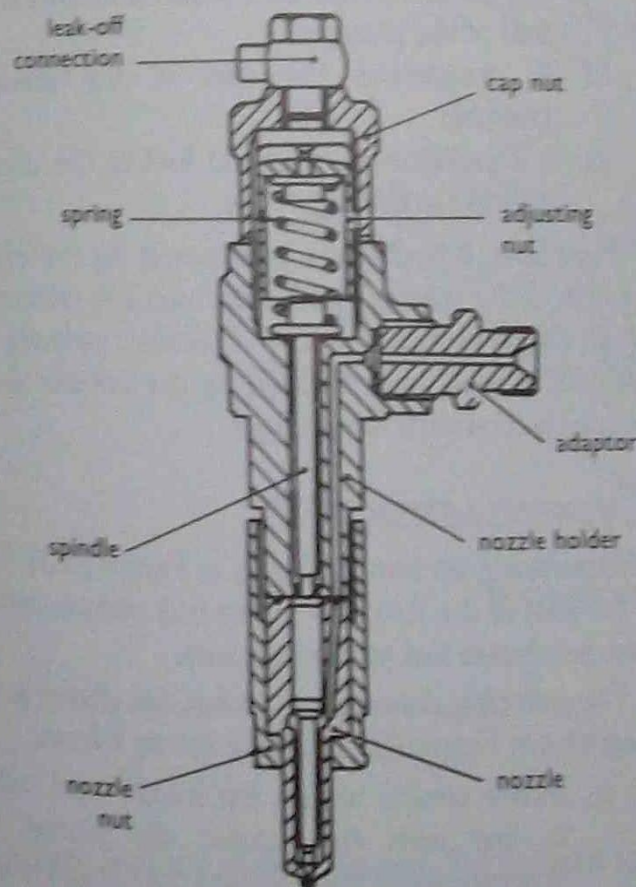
Internal construction of a flanged-type injector LUCAS/CAV
